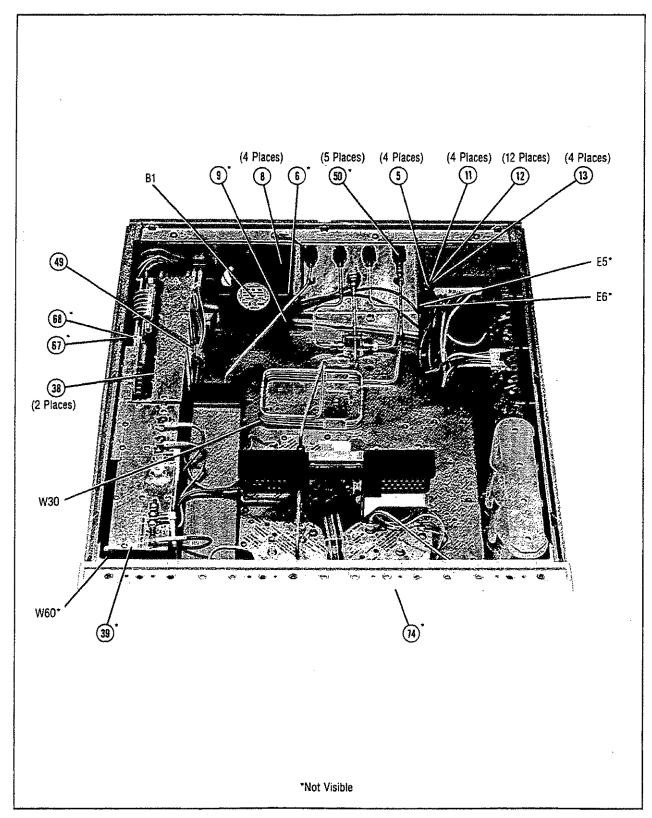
HP 8513A Miscellaneous Mechanical, Chassis, and Electrical Parts (4 of 5)
